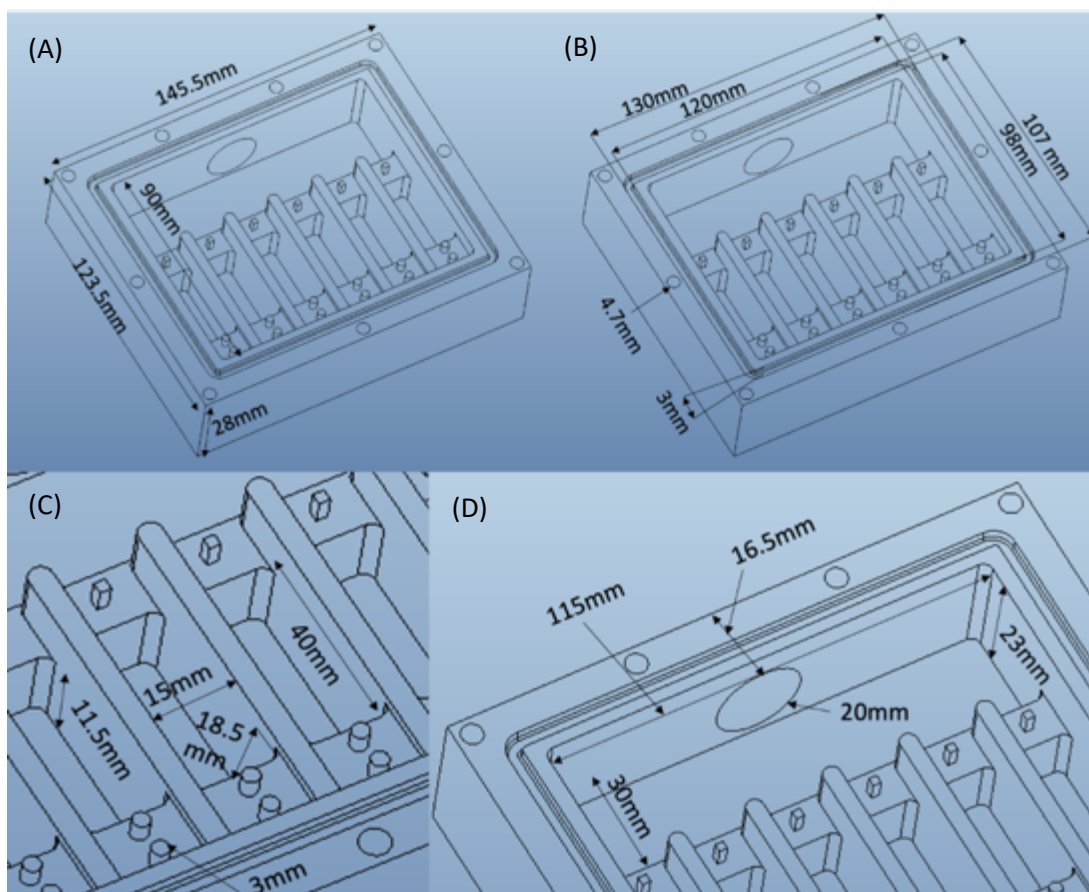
Dimensions of bioreactor chamber body mark 2.1. (A) Outer dimensions of chamber body and internal length of chamber body. (B) O-ring groove dimension and grub screw tap hole diameter. (C) Culture well dimension and attachment pin dimension. (D) 6-way tensile arm run area and bellow hole dimensions
